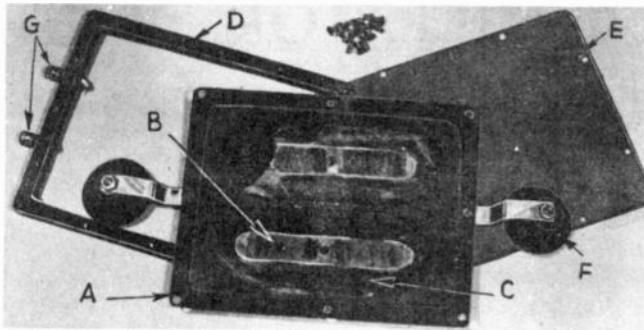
Fig. A. Exploded view of the pickup; A, brass plate; B, saw blade core; C, winding; D, frame; E, fibre back; F, suction cup mounts; G, terminal posts. Note the insulating compound.
